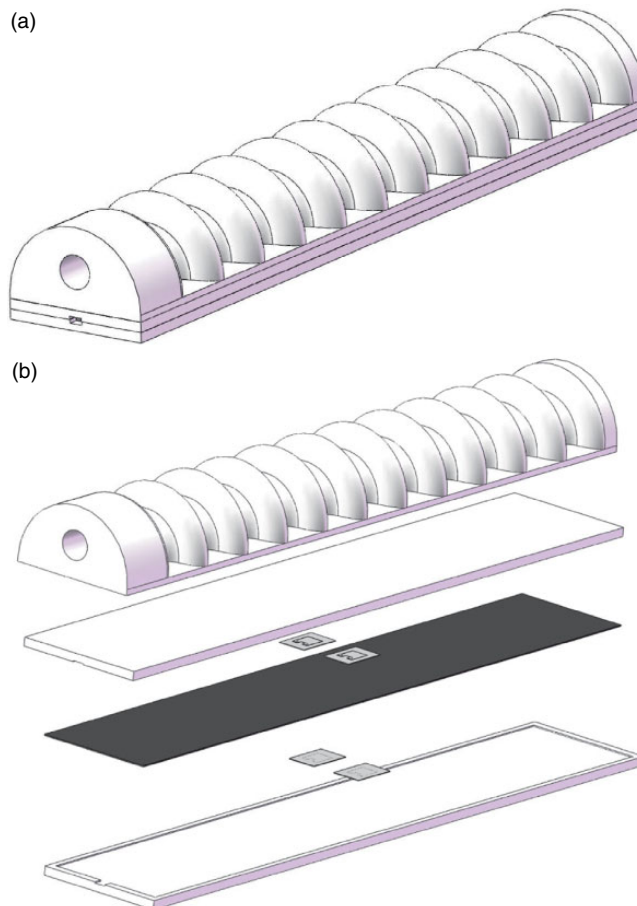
Fluidic elastomer actuators assembly view (a) Assembly view and (b) Exploded view.
